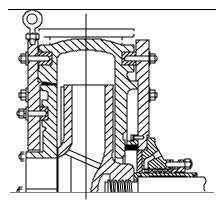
LSA Hard Metal Wet End, H construction (integral hub liner)
